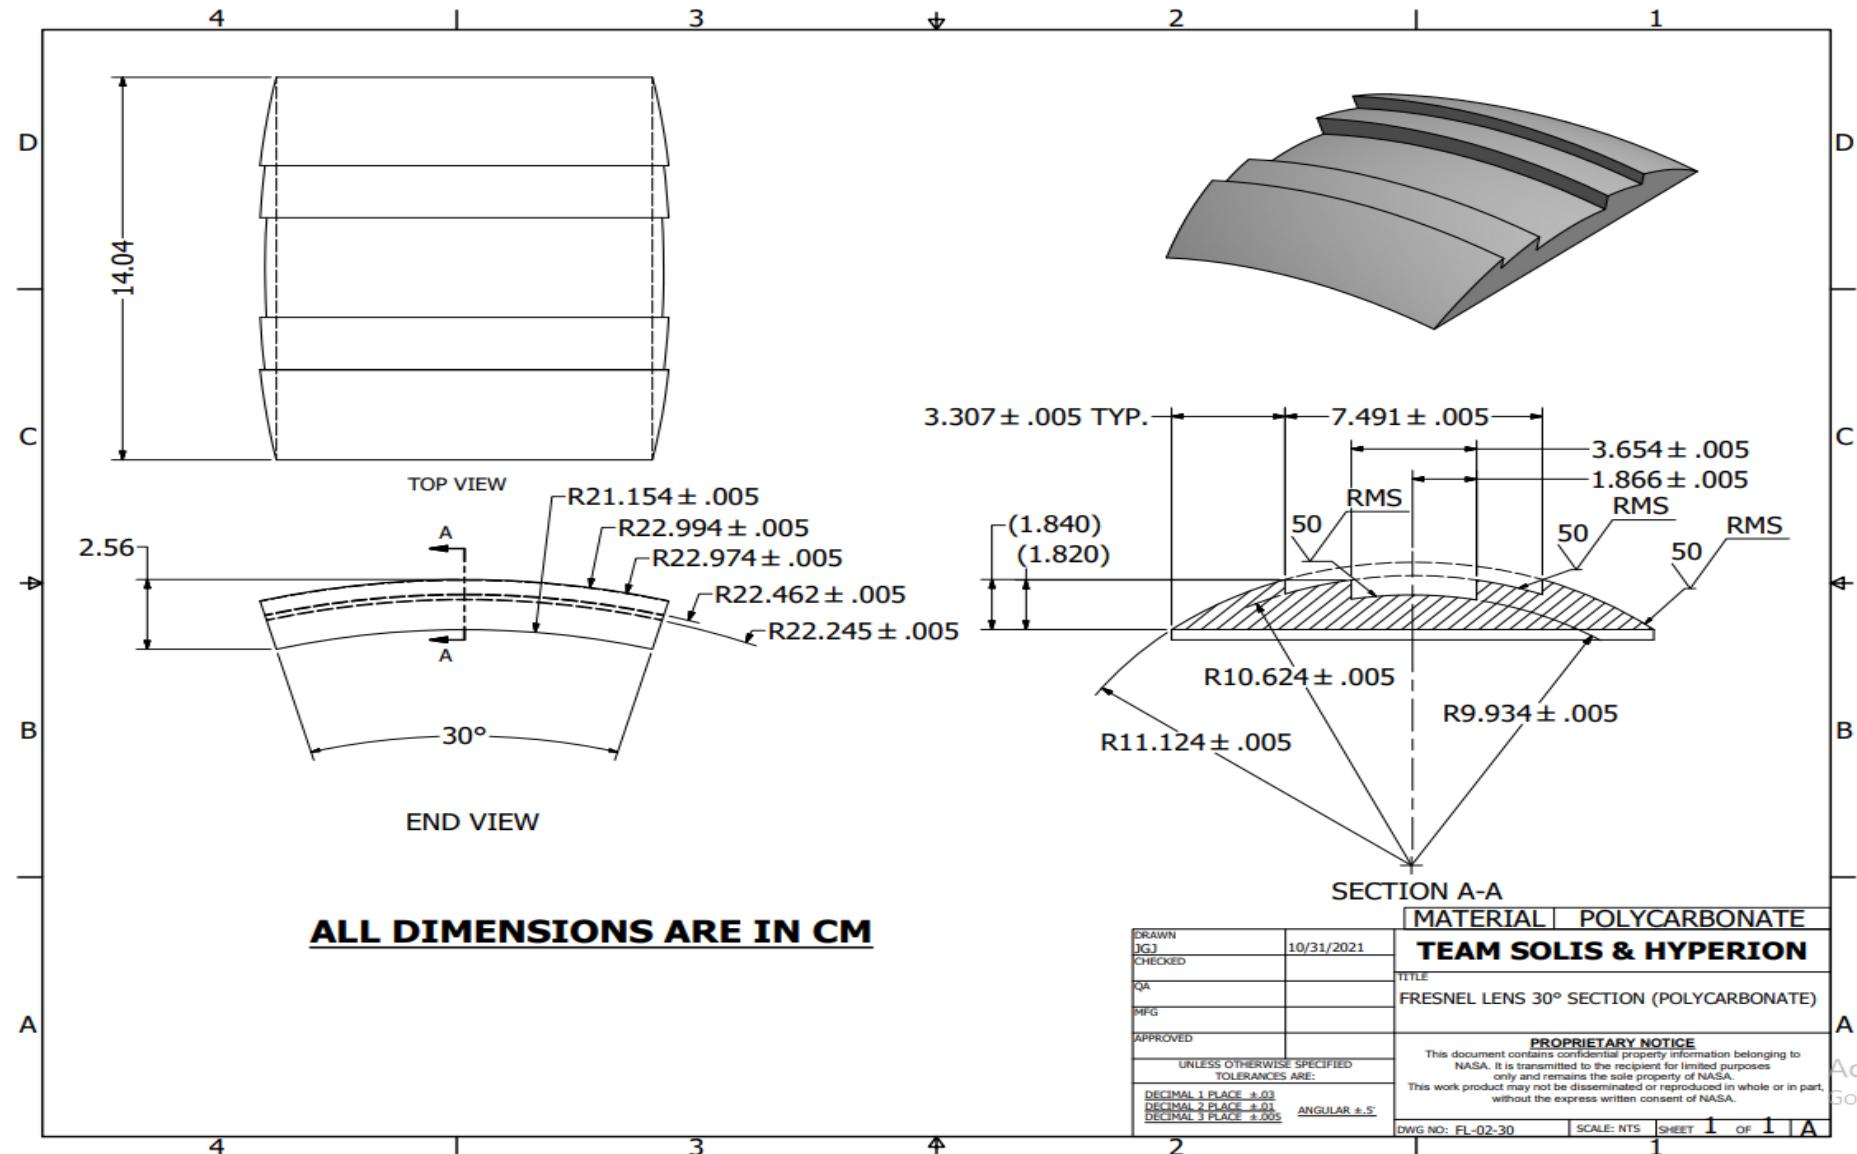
Manufacturing Drawing of Polycarbonate Fresnel Lens 30° Revolve Piece.
